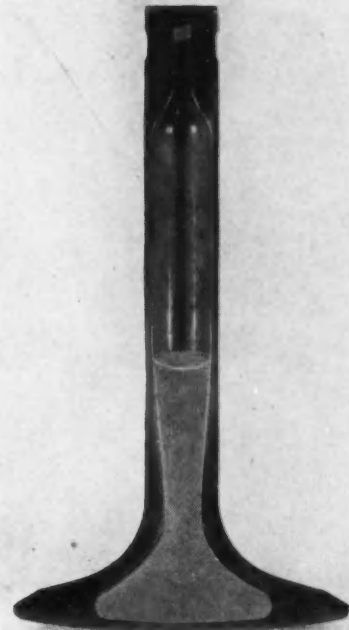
Section of Cyclone Exhaust Valve Showing Hollow-Head Design Partly Filled with Sodium
